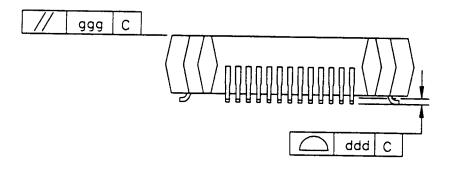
PRINCIPAL DIMENSIONS & DATUMS
